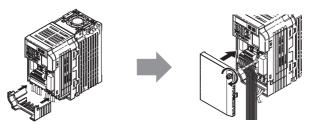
Reattach the Protective Covers on an IP20/Open-Chassis Drive
